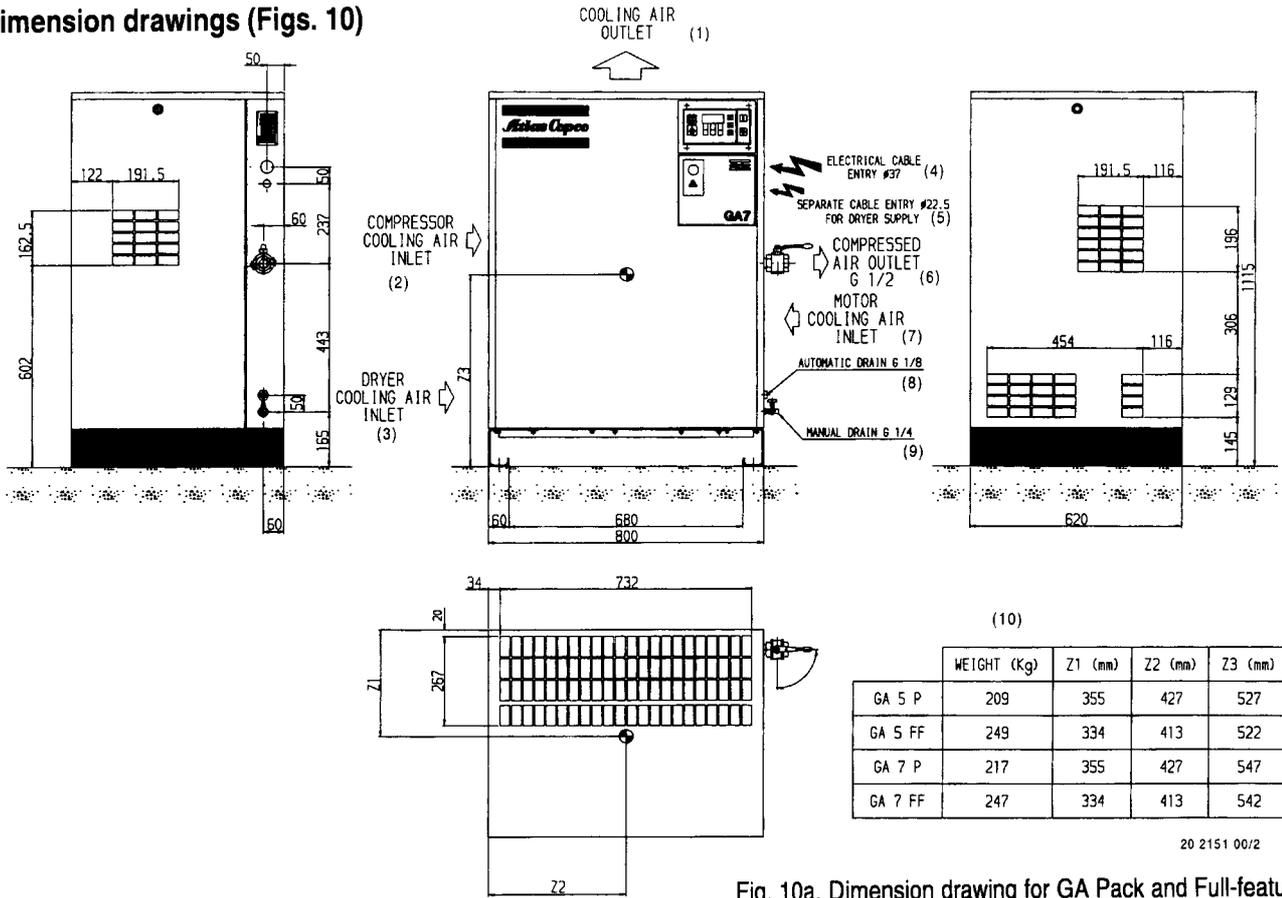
Dimension drawing for GA Pack and Full-feature
